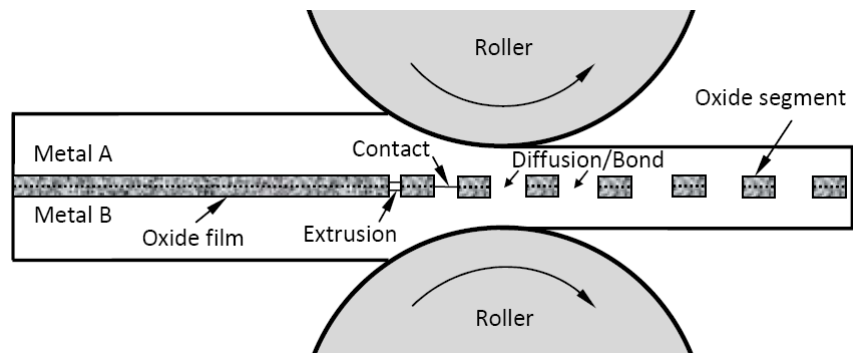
Schematic illustration of the fracture of the brittle cover layers and the extrusion of the exposed metals during roll bonding process
